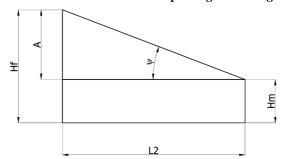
Diagram for calculating the shaft section length  $L_2$  and the screw shaft taper angle
